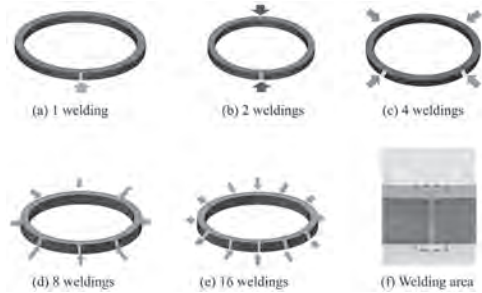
Samples with laser welding after EDM- and laser-cutting and its welding area.
